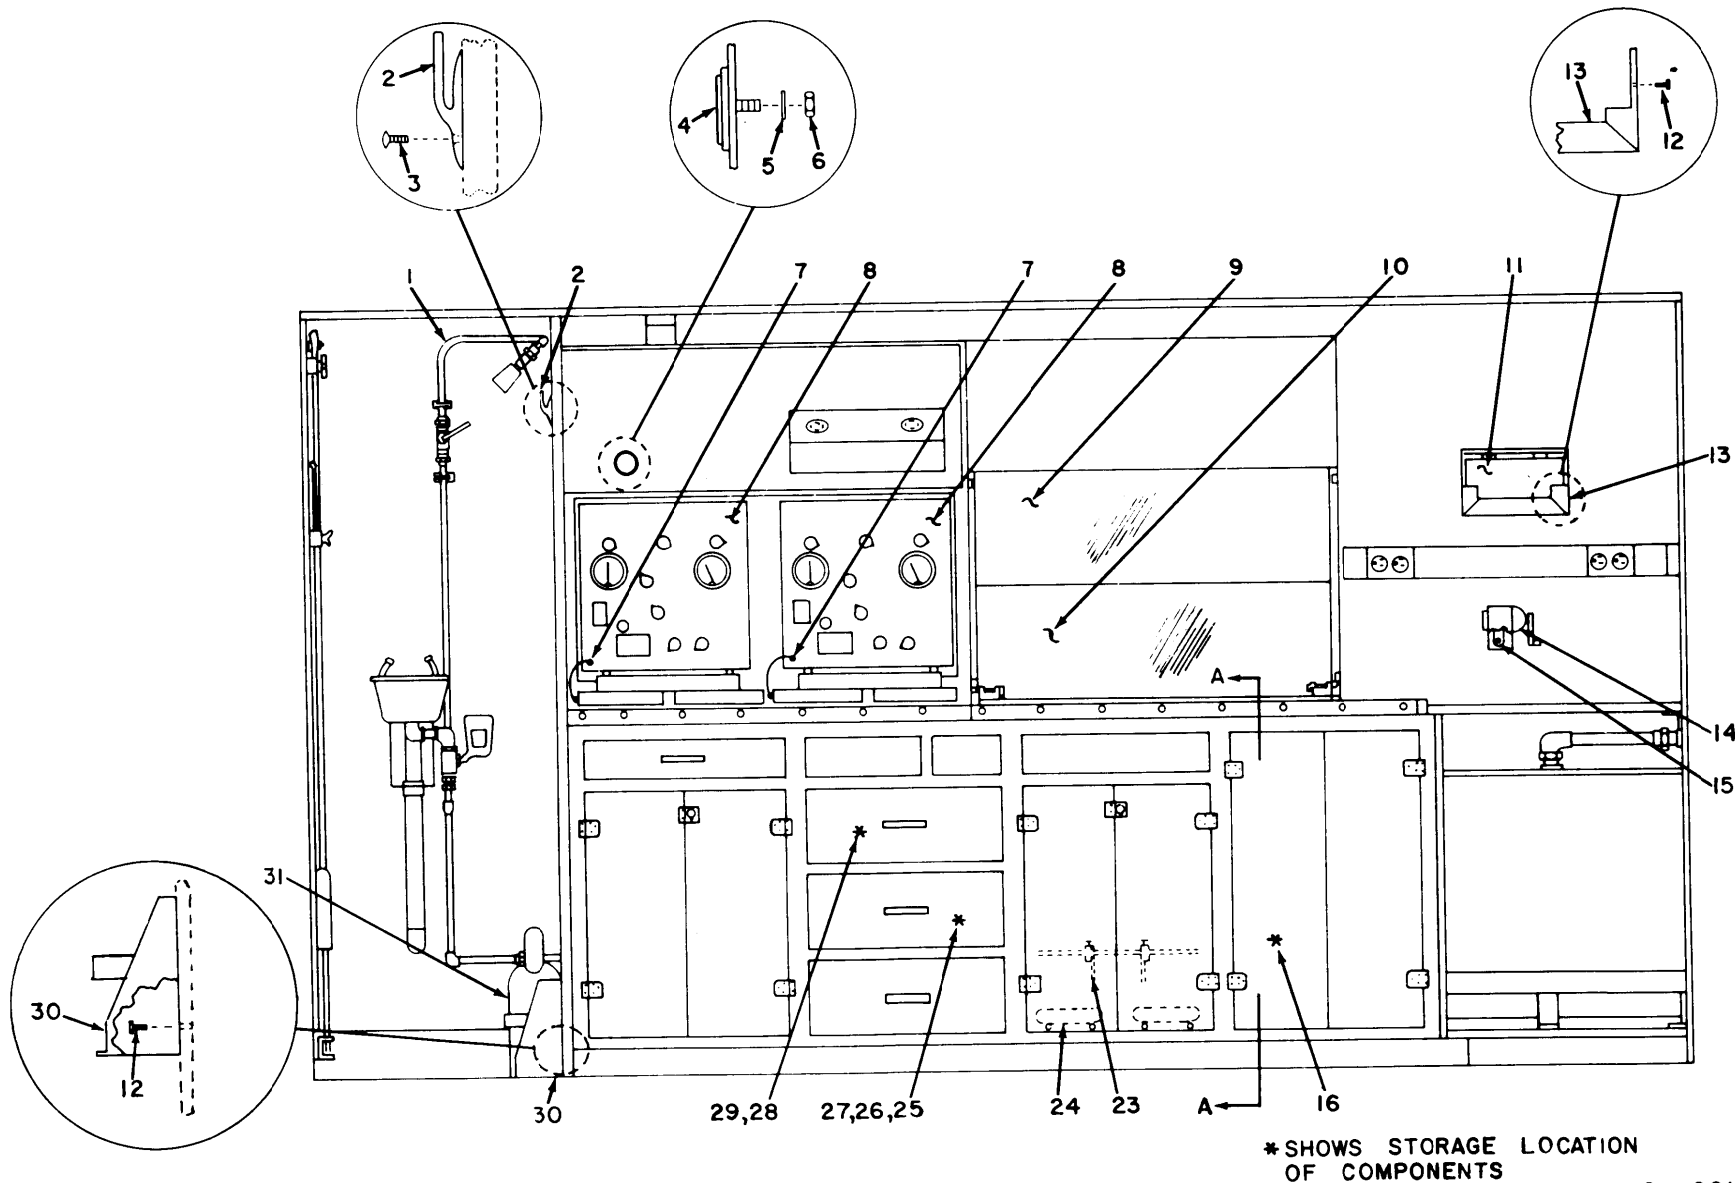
Shop equipment, battery servicing, shelter mounted, AN/TSM-133(sheet 1 of 6).
